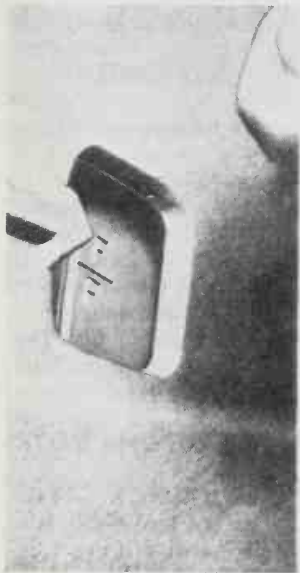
To check fuel pump timing, set control lever to "RUN" position and align timing marks on flywheel and fan shroud as shown.
